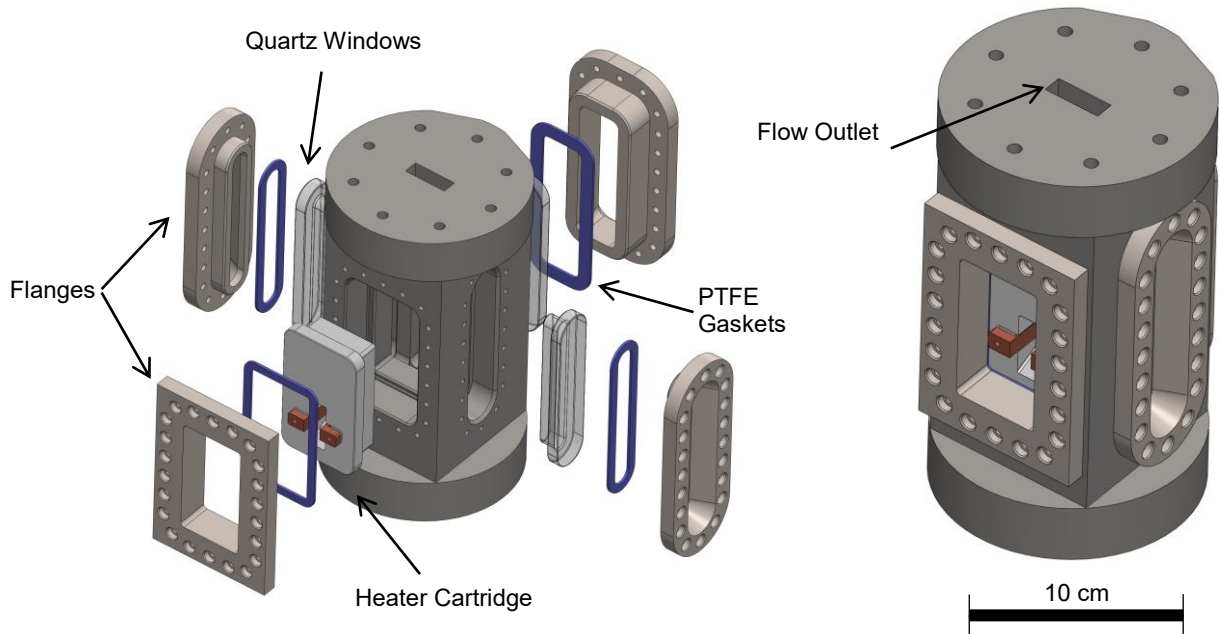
Test section design. Exploded (left) and assembled (right) views.
